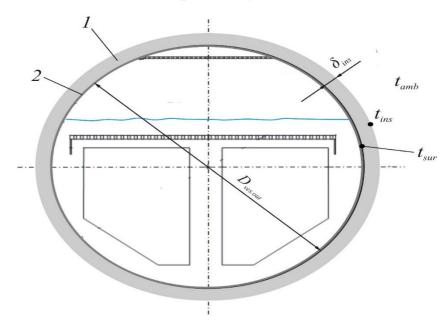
Design scheme of single-layer thermal insulation with a coating layer: 1 is thermal insulation; 2 is vessel of SG
